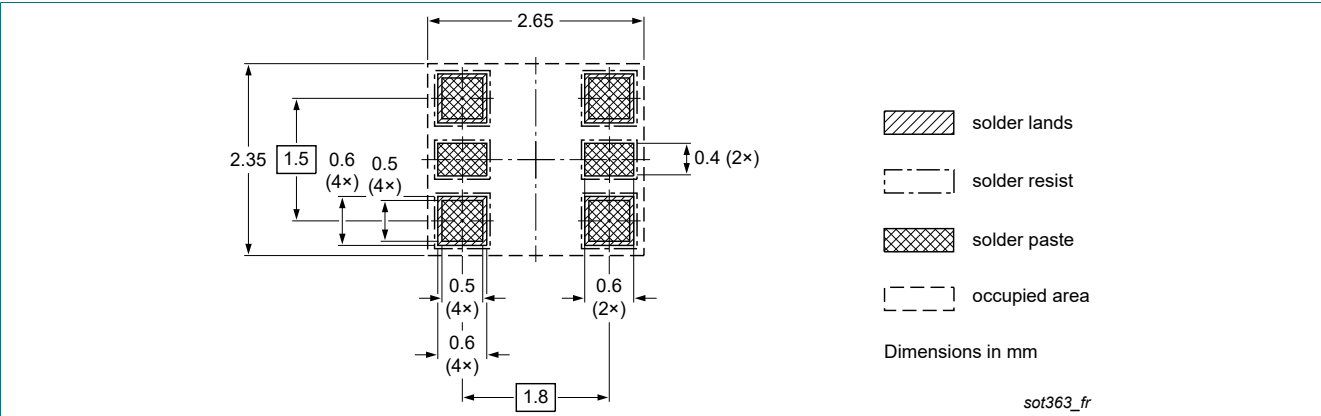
Reflow soldering footprint for TSSOP6 (SOT363)
